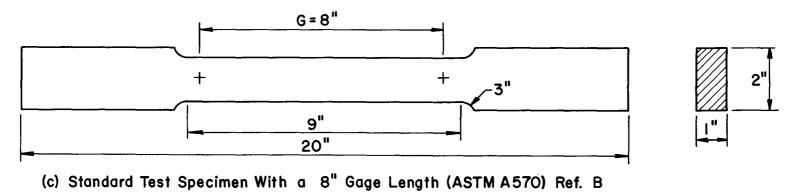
Layout and Dimensions of the Tension Test Specimens
